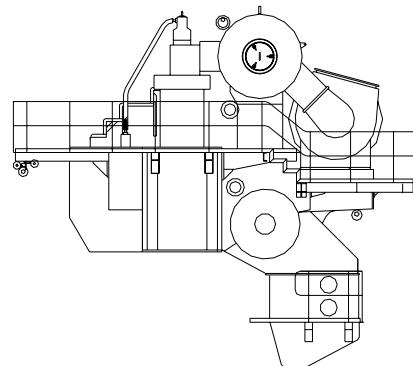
Dispatch pattern, engine with turbocharger on exhaust side, (4 59 122)
